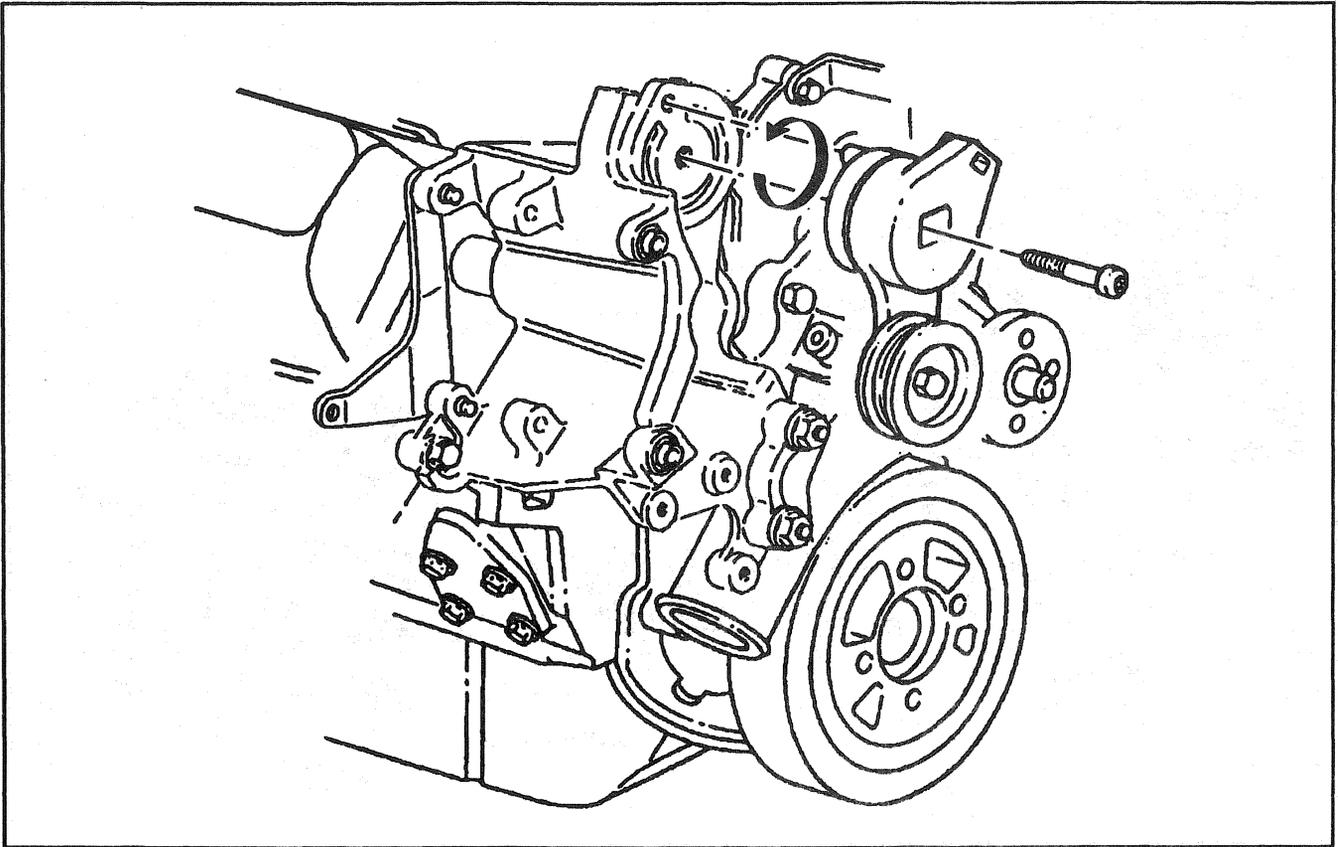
Belt Tensioner Assembly (Diesel Engines)
